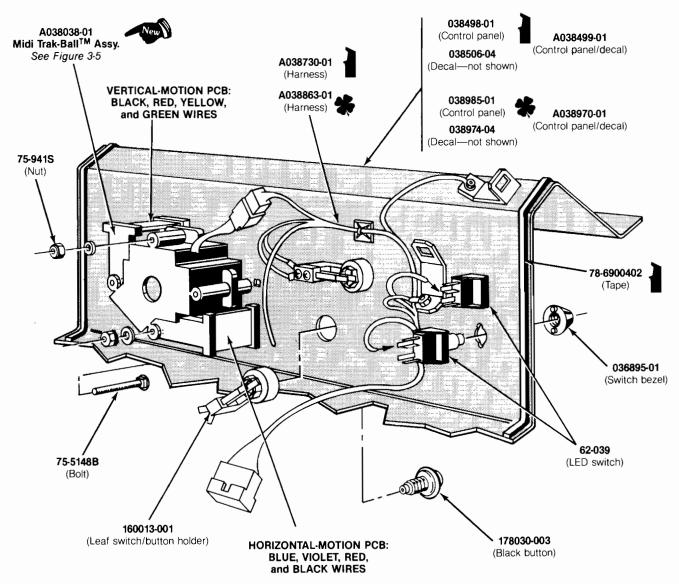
Control Panel Assembly Upright Cabinet A038500-01 A Ireland-Built Cabinet A038969-01 A
